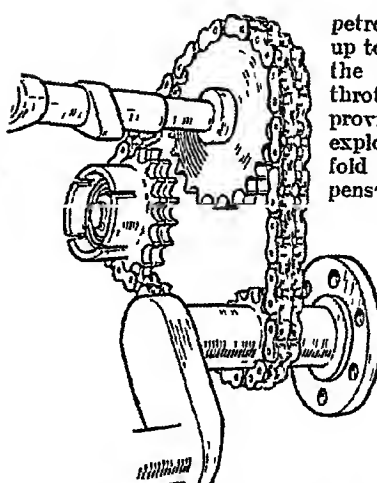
Roller-chain drive connecting crankshaft and camshaft
